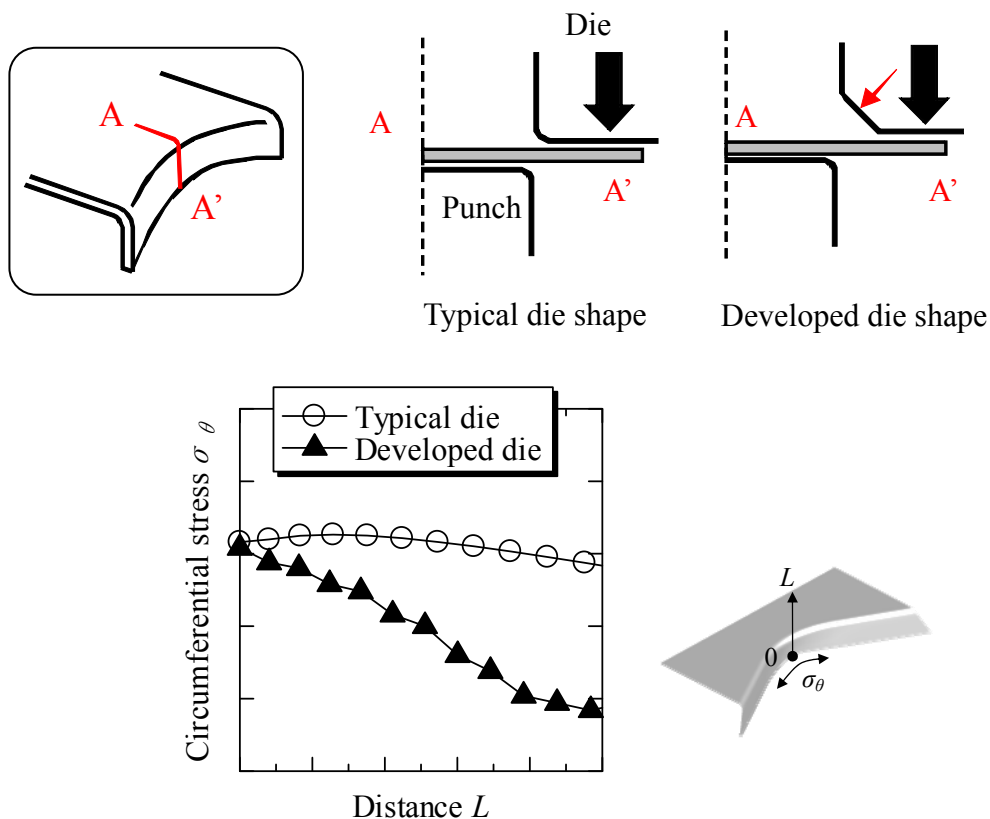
Schematic geometry of tool shape and blank for stretch flange.
